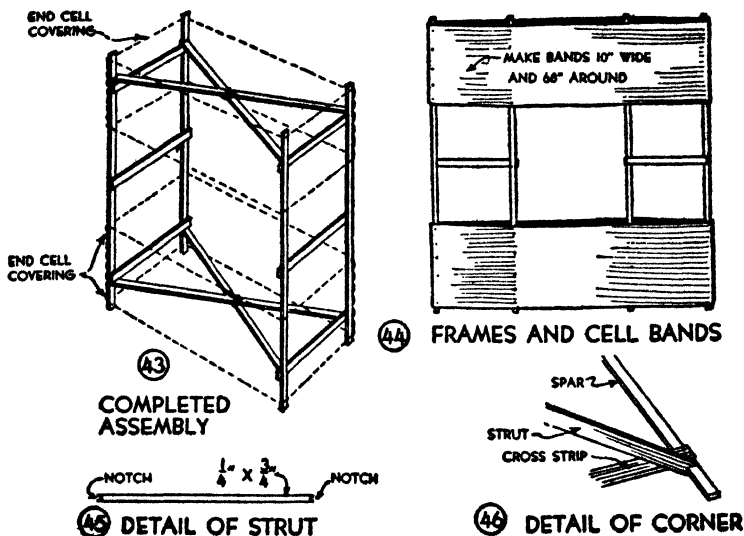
COMPLETED ASSEMBLY OF BOX KITE FRAMEWORK
